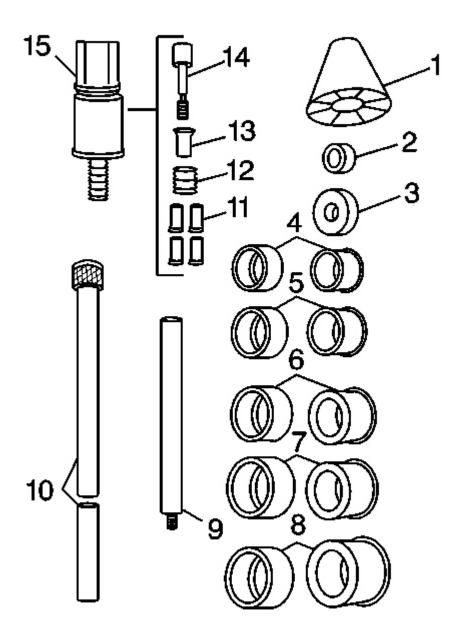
View Of J 33049 Camshaft Bearing Service Kit Components Courtesy of GENERAL MOTORS CORP.
